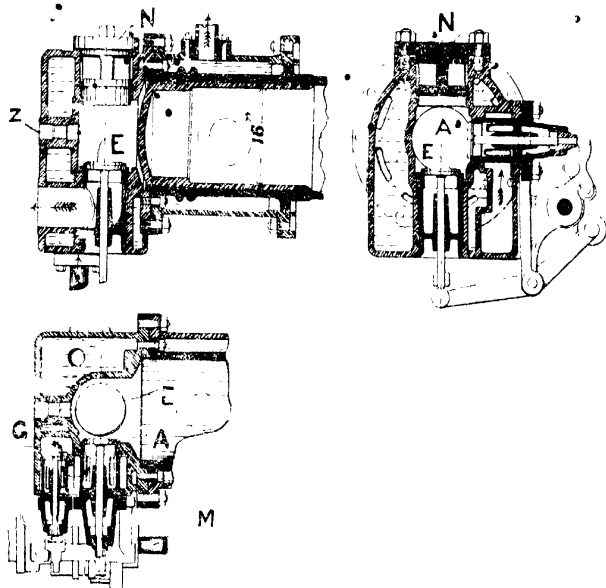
Disposition of gas, admission and exhaust valves in Paxman horizontal gas engine, showing also typical arrangement of side shaft cam-actuating gear.
